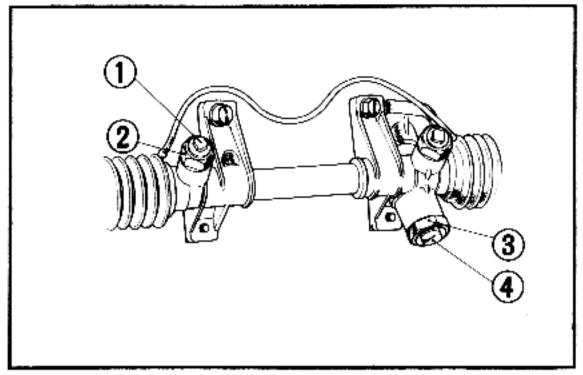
① Rack Adjusting Nut ② Rack Adjusting Bolt ③ Pinion Washer Nut ④ Pinion Washer Bolt
